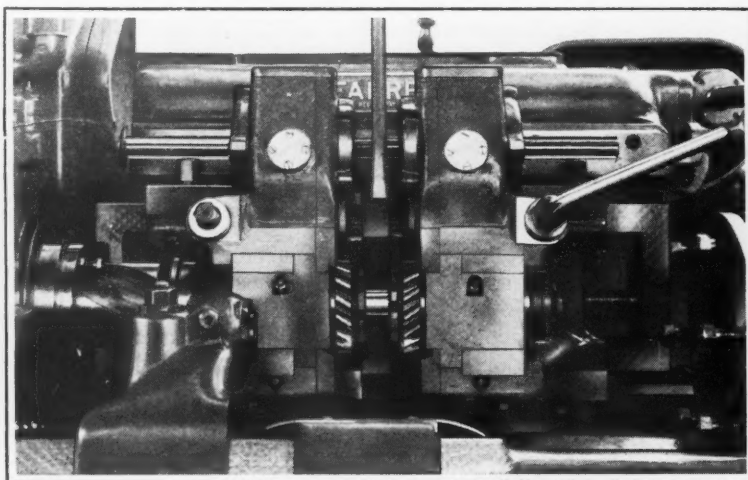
View of the Cutter Mechanism with Two Helical Cutters in Position
